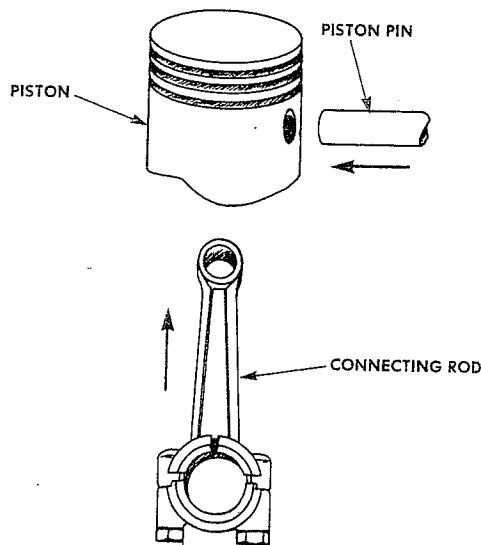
The connecting rod is attached to the piston by a pin so it can move.
